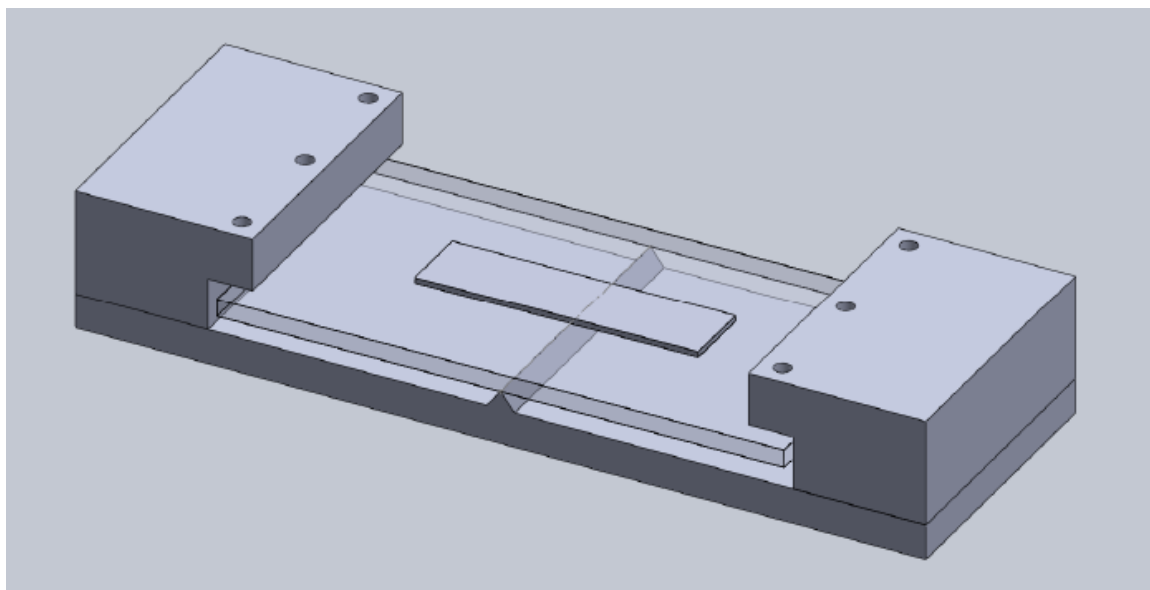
CAD drawing of device used to make adjustable trenches in silicon.
